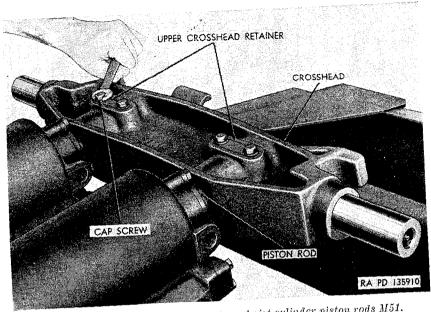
Removing crosshead from hoist cylinder piston rods M51.
